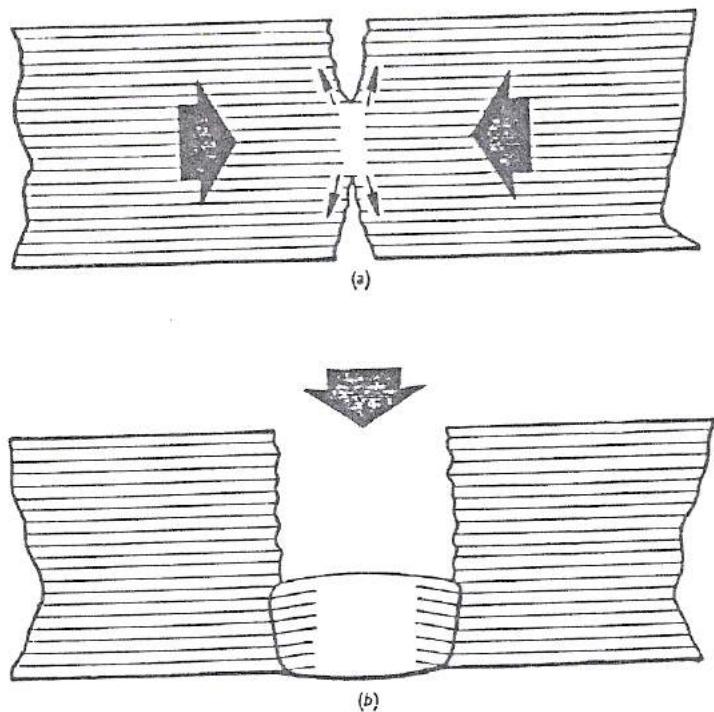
Basic mechanisms of welding (a) Union by flow,
